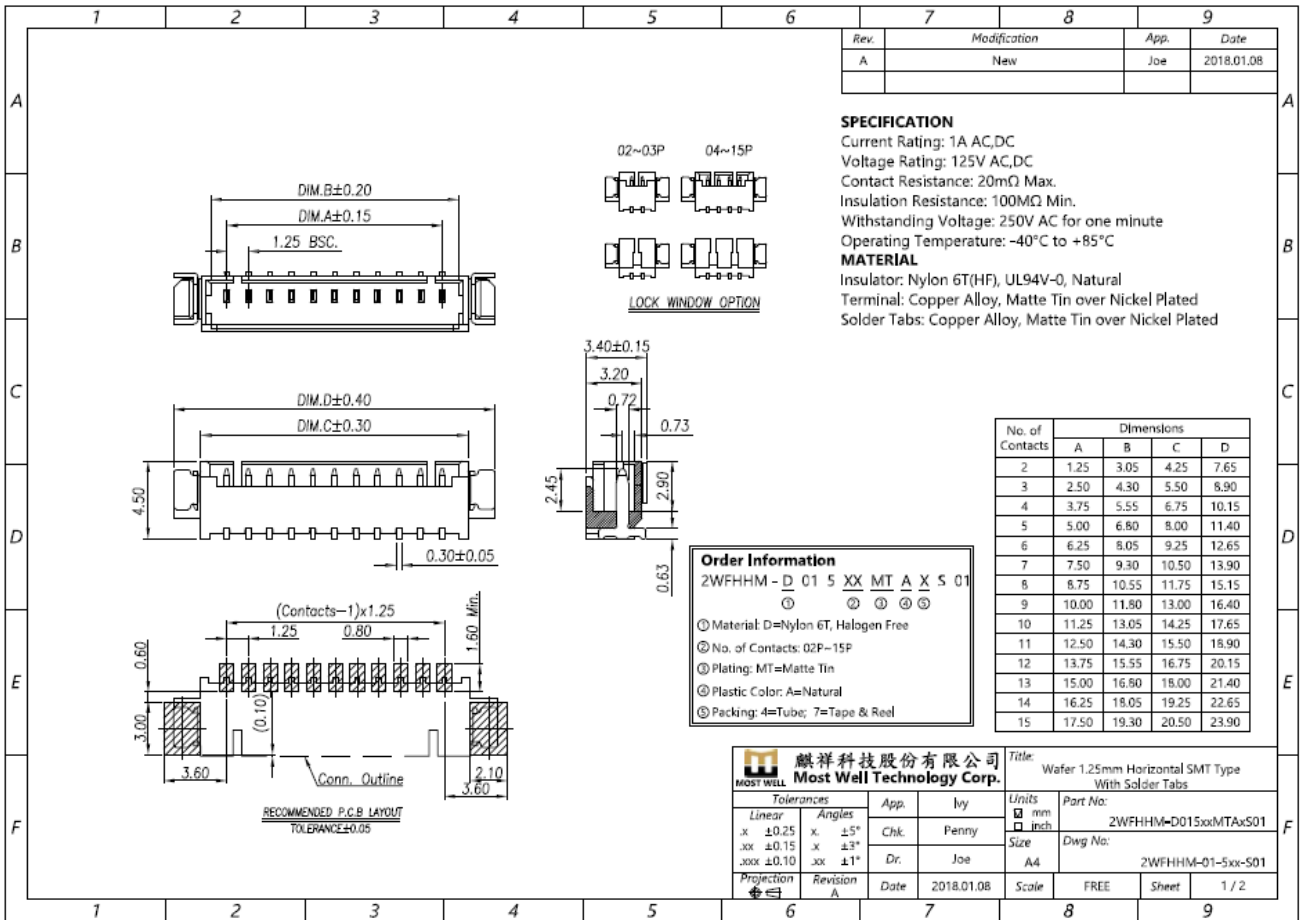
Wire to Board SMD 1*4P Connector Drawing (CN1/CN2)
